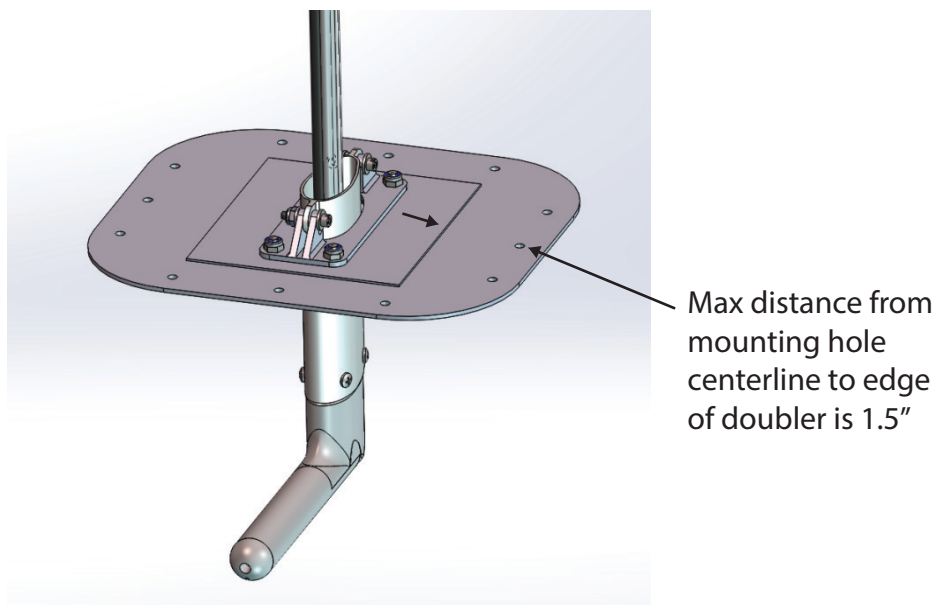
GAP 26 Shown with Inspection Panel and Doubler Plate
